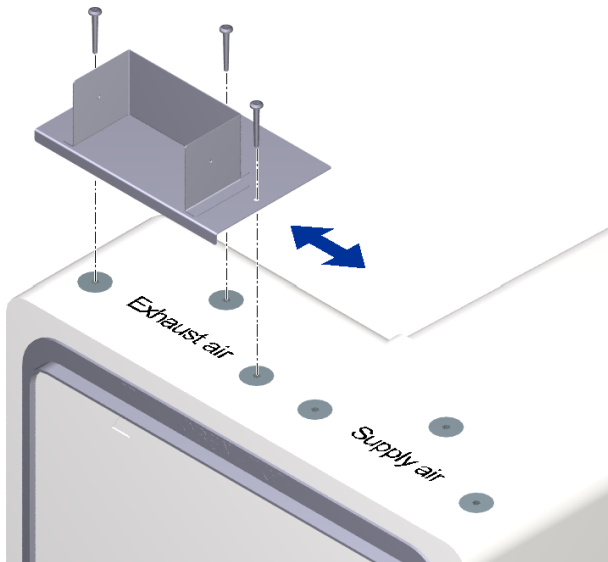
M-WRG-M/MB-FK1, Fixing the fixing plate for exhaust air or supply air
